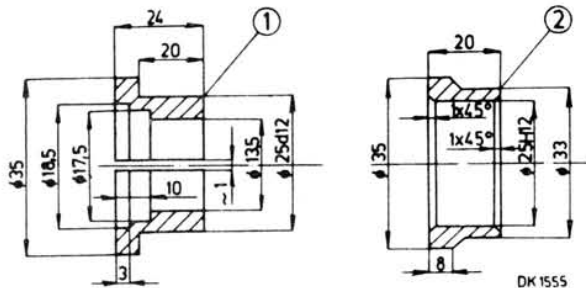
/2 - Secondary Piston Cup Mounting Fixture for dia. 12 mm Master Cylinder (1 - guide bush, 2 - clamping ring)
